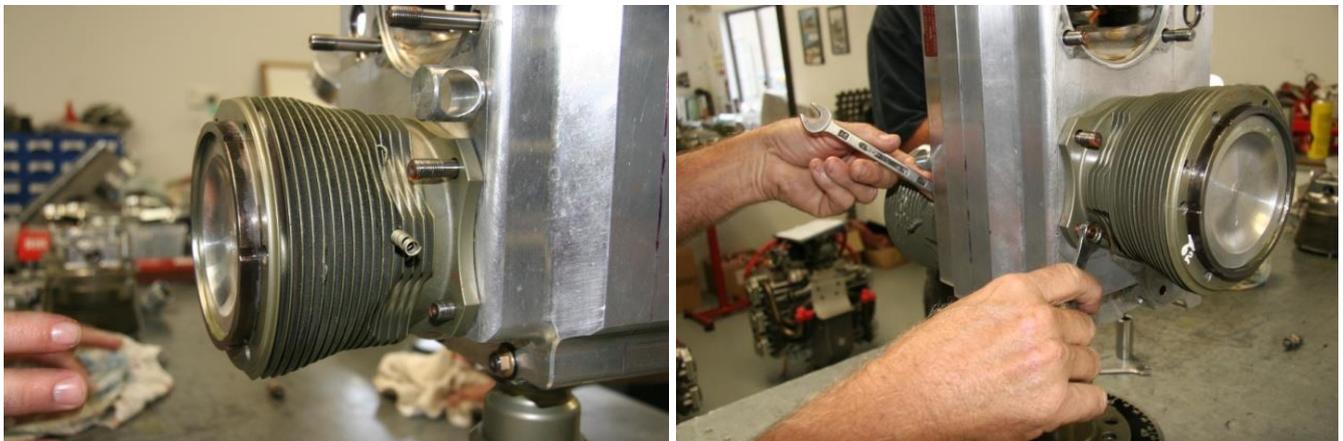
Fitting Cylinder, Inserting & Tightening Through-Bolts
